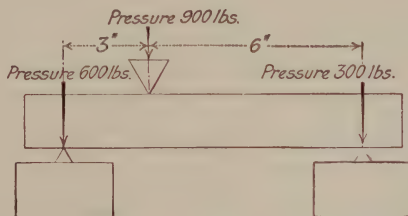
Shows a mechanical principle which should be applied when clamping work.
